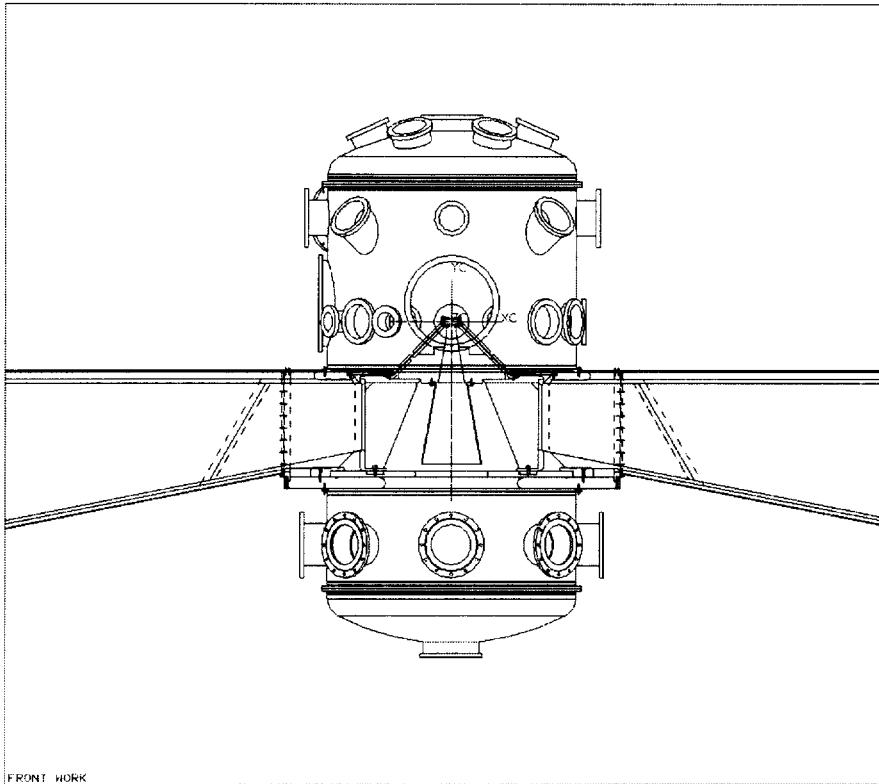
Cut-away section of the Atlas machine, including (from edge to center): vertical tri-plate, upper and lower vessel sections, PFC, and raised target.
